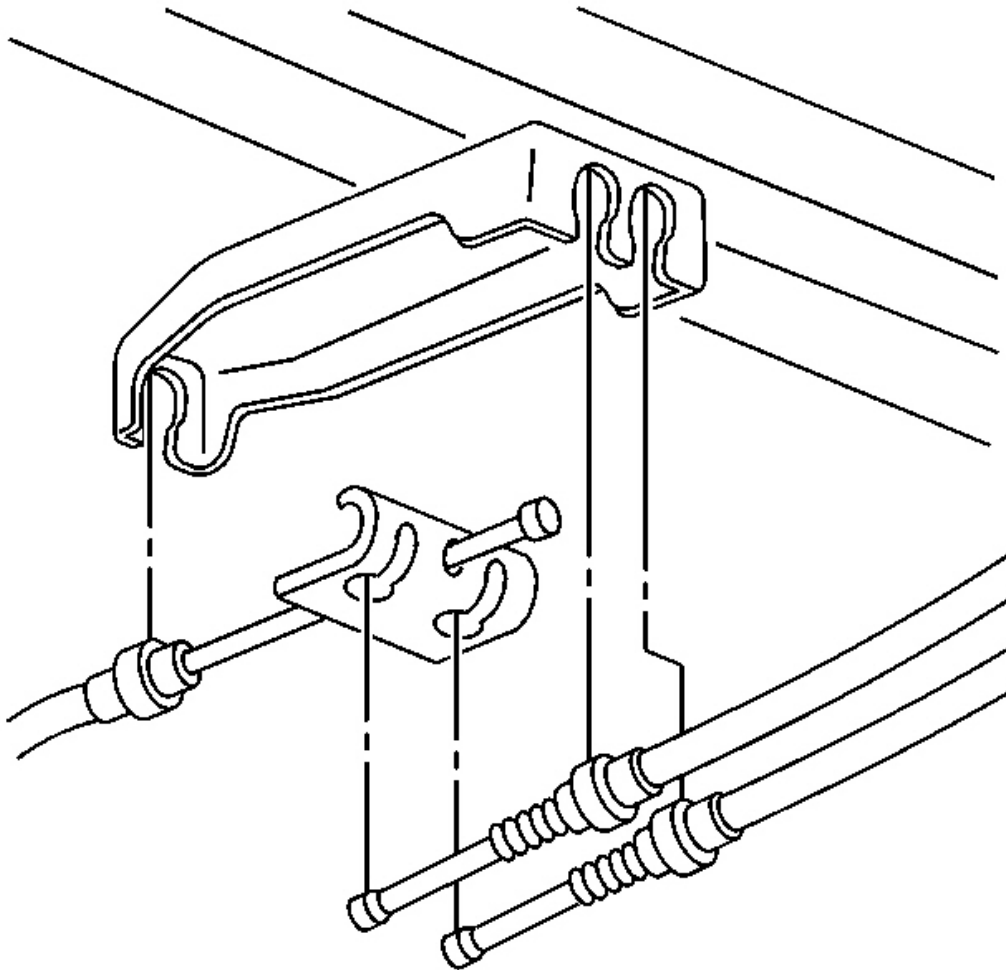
Front & Rear Park Brake Cables To Equalizer & Retainer
